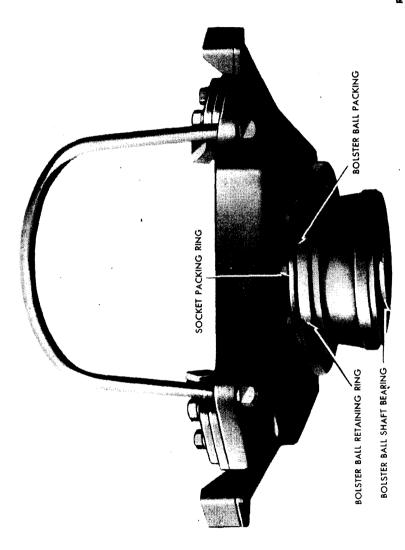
Bolster and Bolster Ball Retaining Ring — Front View
